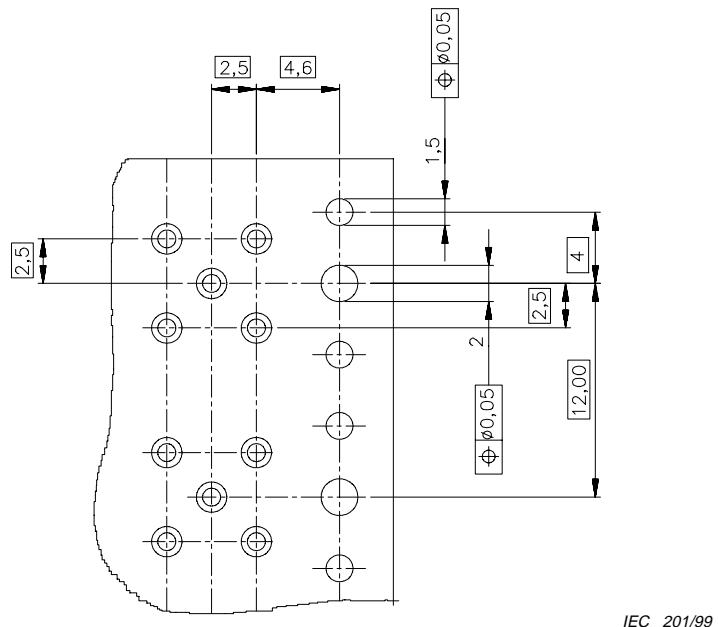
Recommended printed board layout for solder to board version, component side
